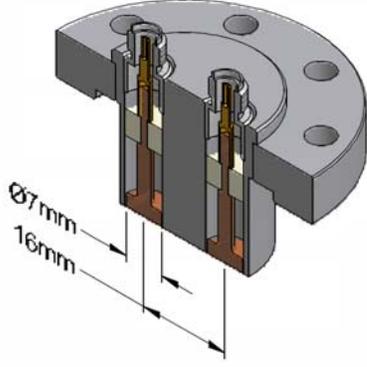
The 7-mm buttons mounted on a multipole vacuum chamber. Not optimized design is shown.
